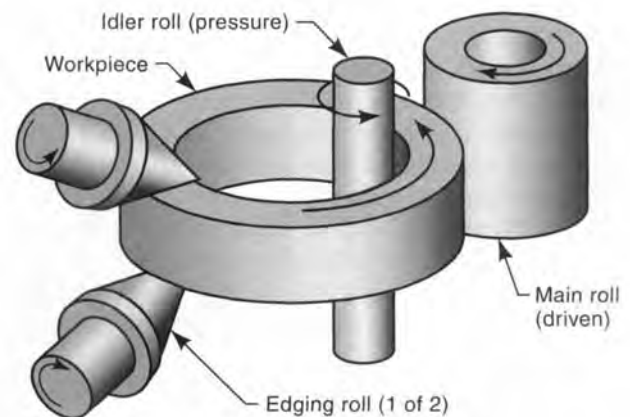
A4h Horizontal ring rolling to make a ring-shaped part with a rectangular cross section. (Courtesy Forging Industry Association.)
